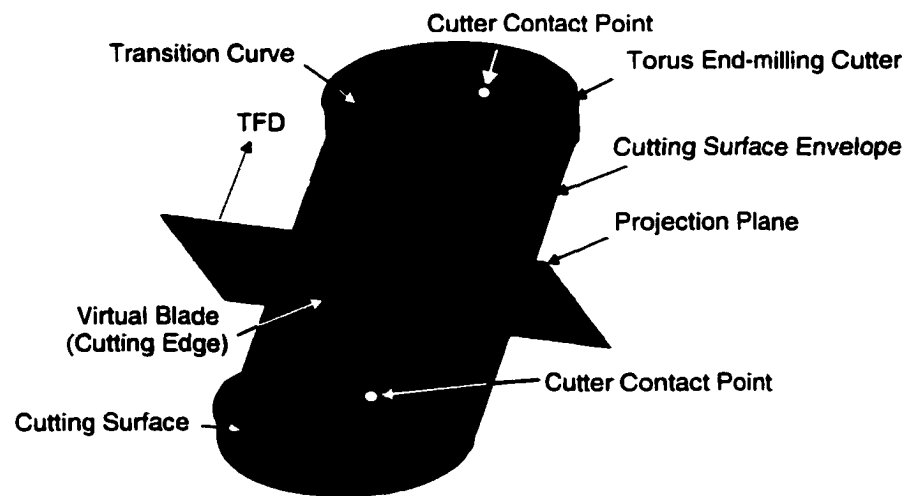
Generic Machining Model of Sculptured Parts for Effective Cutting Edge
